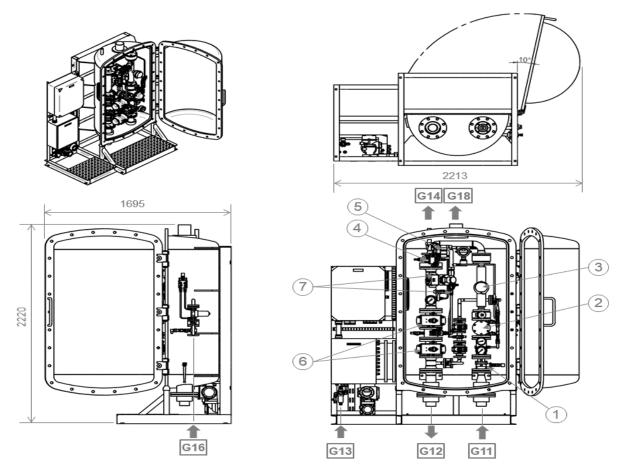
Typical drawing of enclosed type gas regulating valve unit
